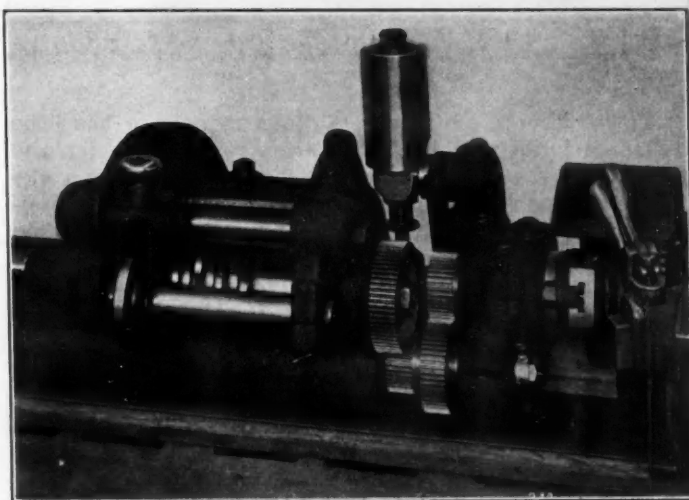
ATTACHMENT FOR GRINDING CAMS
